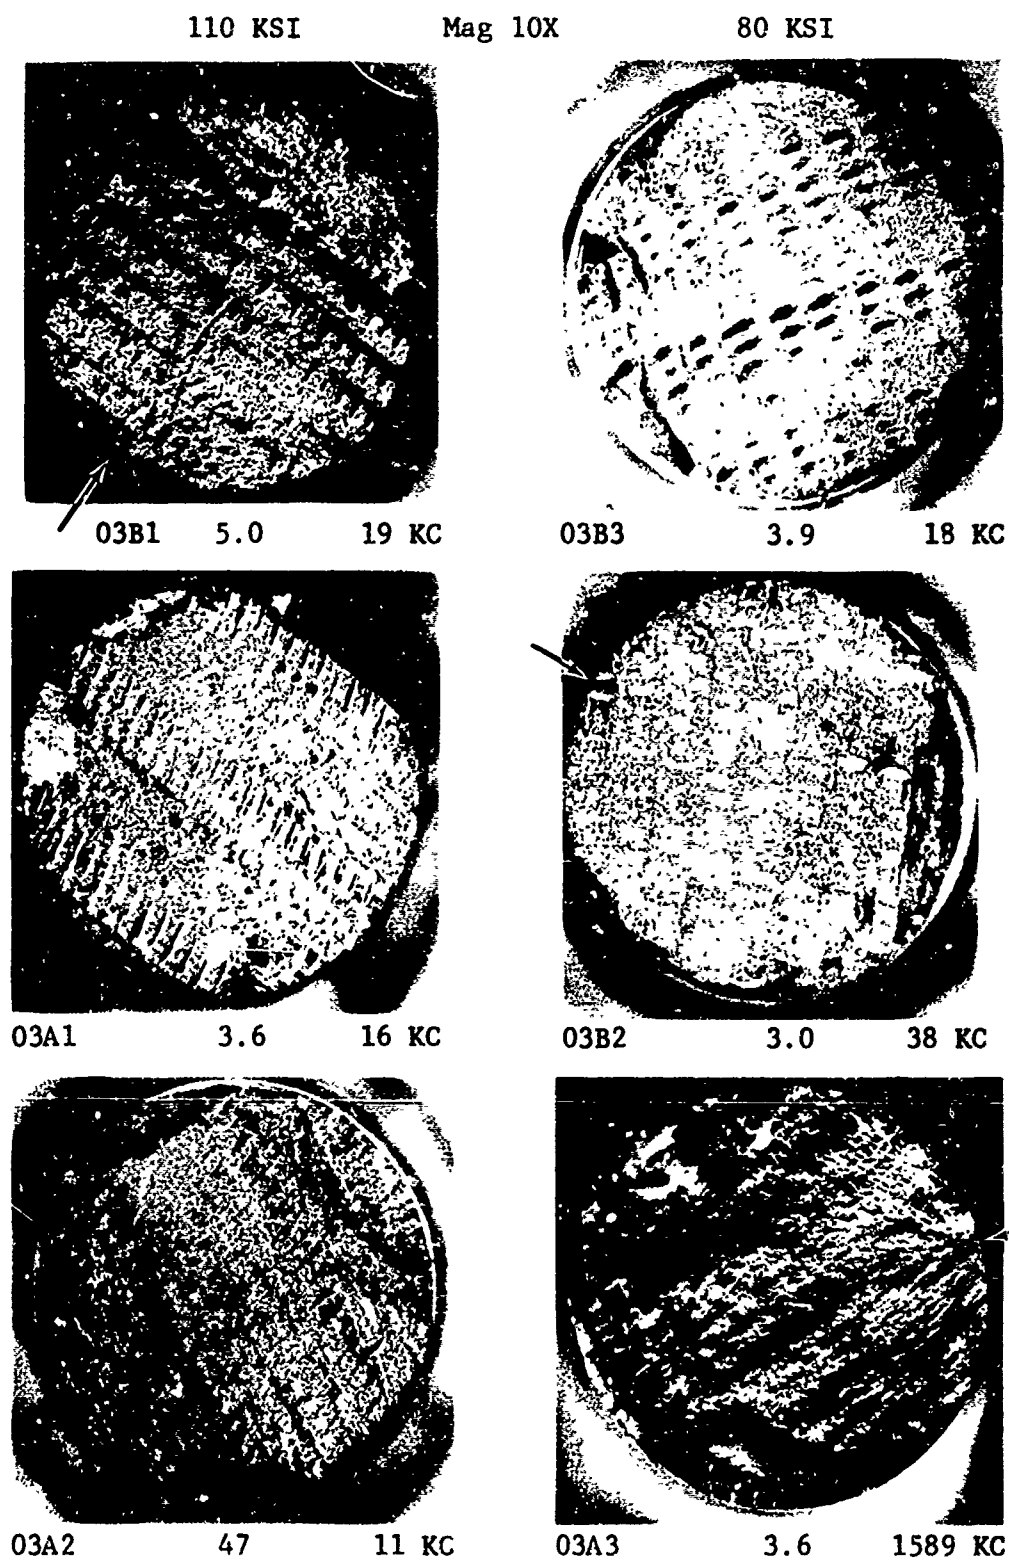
Fracture Surfaces of Failed Fatigue Specimens Series 03-
